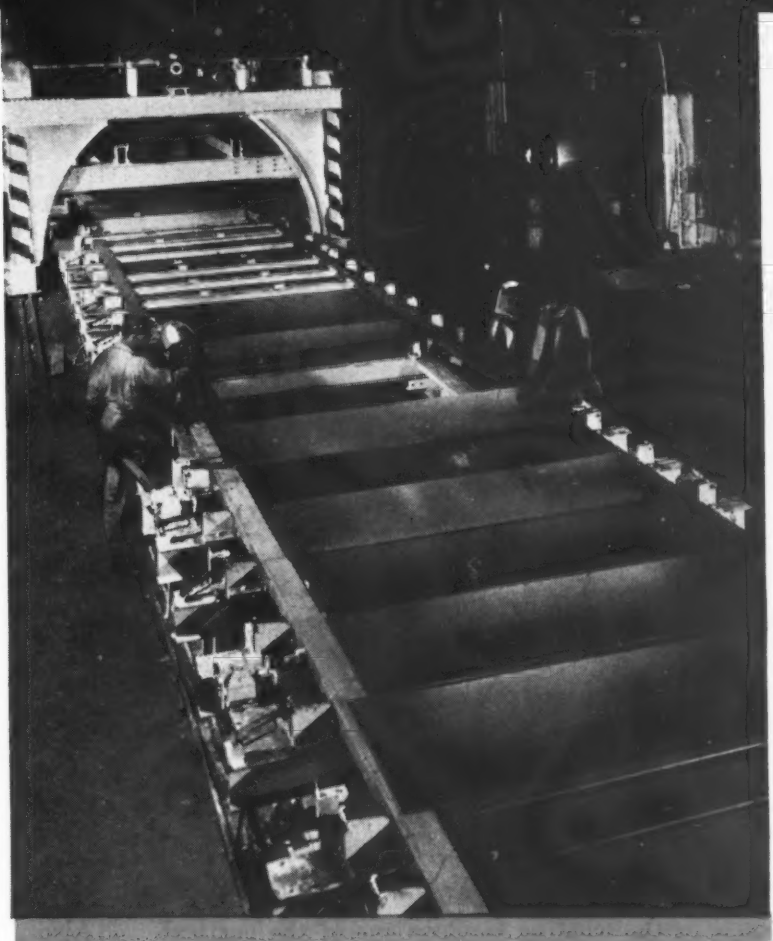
Second Station along Car-side Welding Machine, where Steel Sheets are Assembled by Tack-welding, Ready for Automatic Welding
